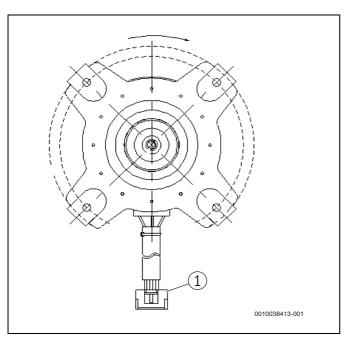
Fan motor connector (control chip is in outdoor PCB)
